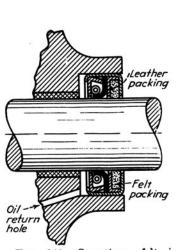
Sometimes felt is used on the dust-exclusion side of the seal in place of leather shown in Figs. 339 and 340. Both sealing materials are retained by spinning the outer casing over the leather clamping cup.
